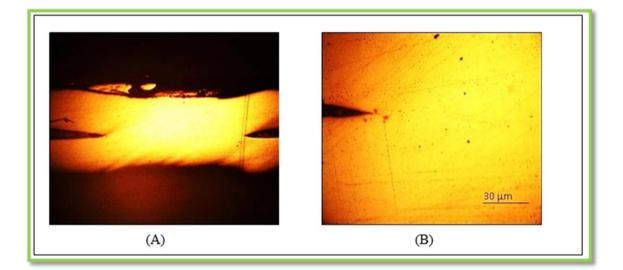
Macroetching structure for (7900 Ampere) weld specimen with different magnifications (A) 5X and (B) 10X.
